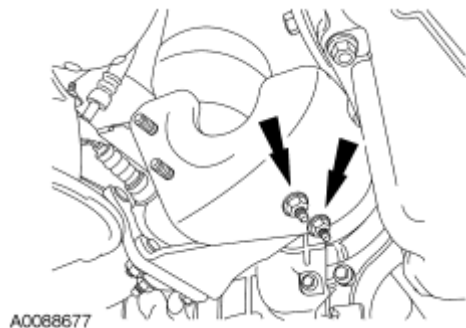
Locating Exhaust-To-Intermediate Shaft Bracket Nuts
